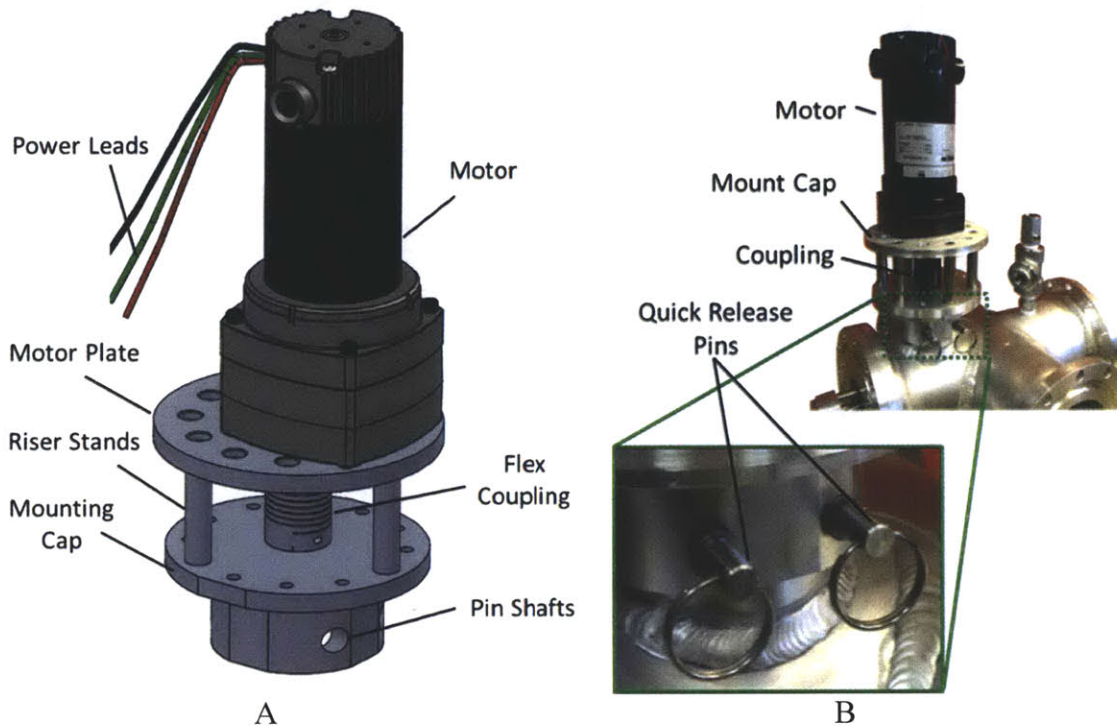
On the left is the drive module assembly showing mounting cap, flex couplings, motor plate, and motor. On the right is the mounting structure for the drive module to the housing via two 9.5 mm quick release pins.
